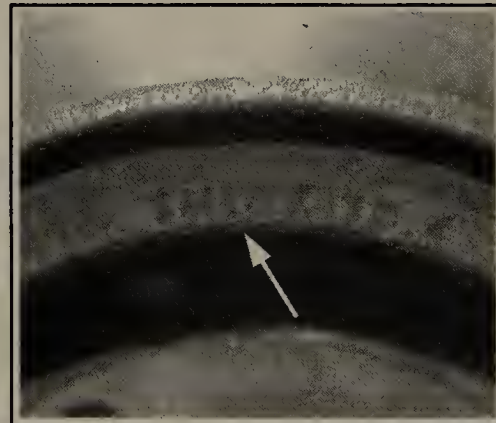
The rotor has a "Minimum Thickness" specification stamped into it
